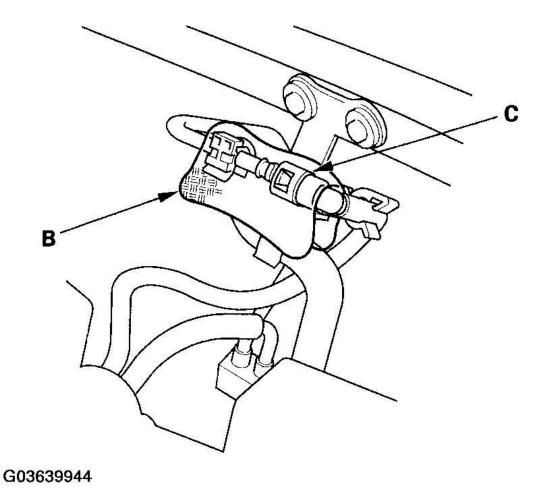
Removing Quick-Connect Fitting Cover (2005-06 Models) Courtesy of AMERICAN HONDA MOTOR CO., INC.
